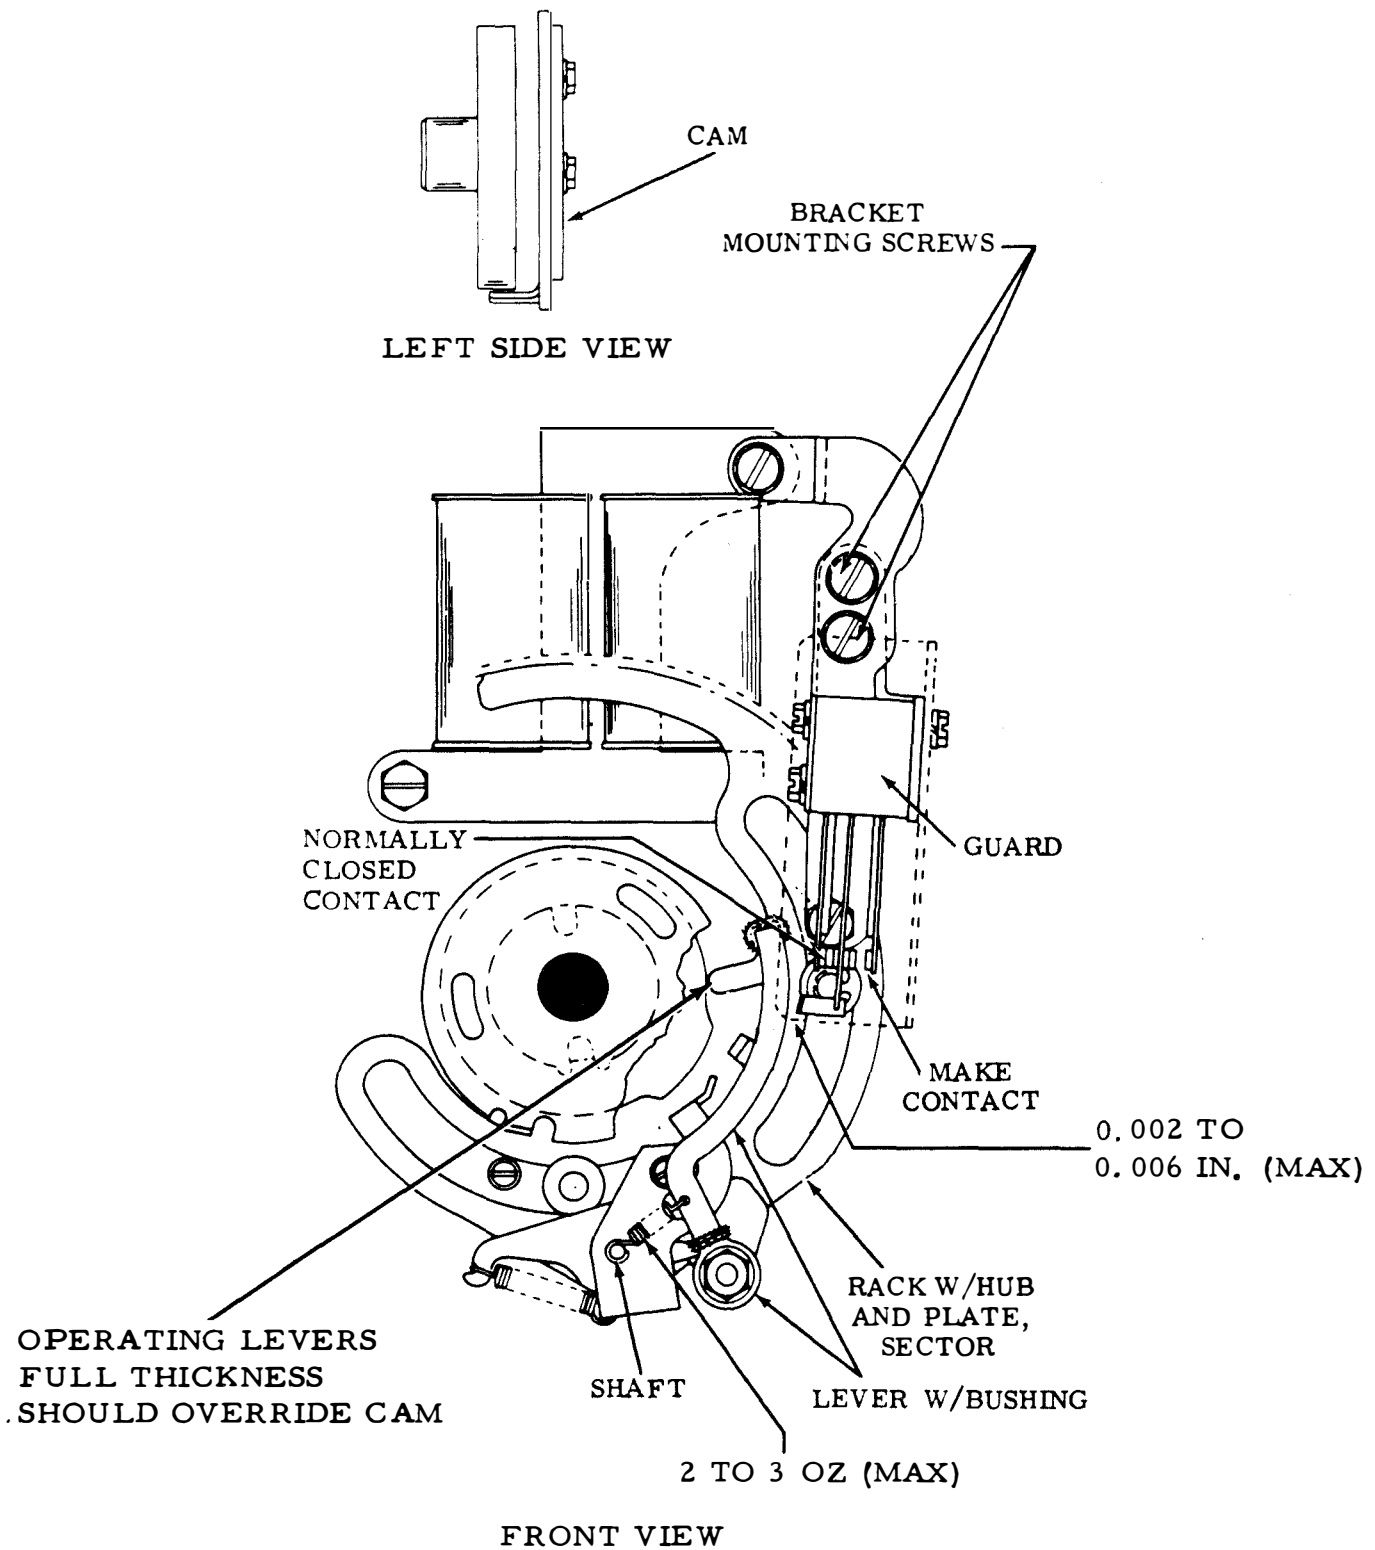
Contact Assembly, Alignment of Operating Lever with Cam, and Operating Lever Spring
